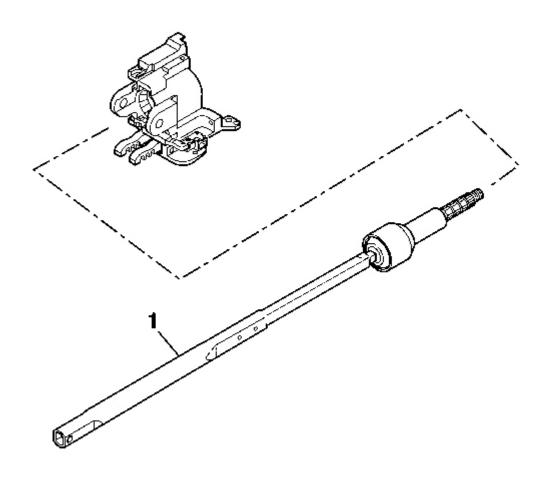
Identifying Steering Shaft Courtesy of GENERAL MOTORS CORP.
